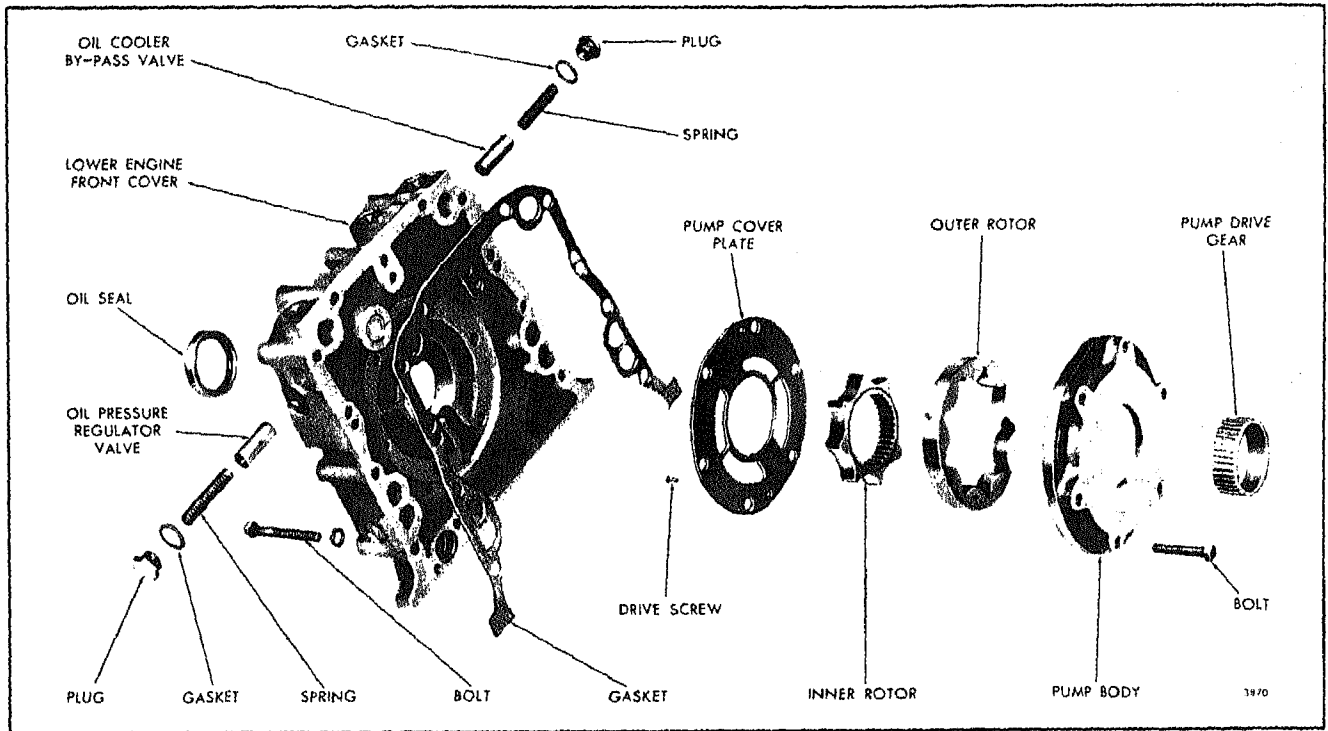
Lubricating Oil Pump Details and Relative Location of Parts (Current)
